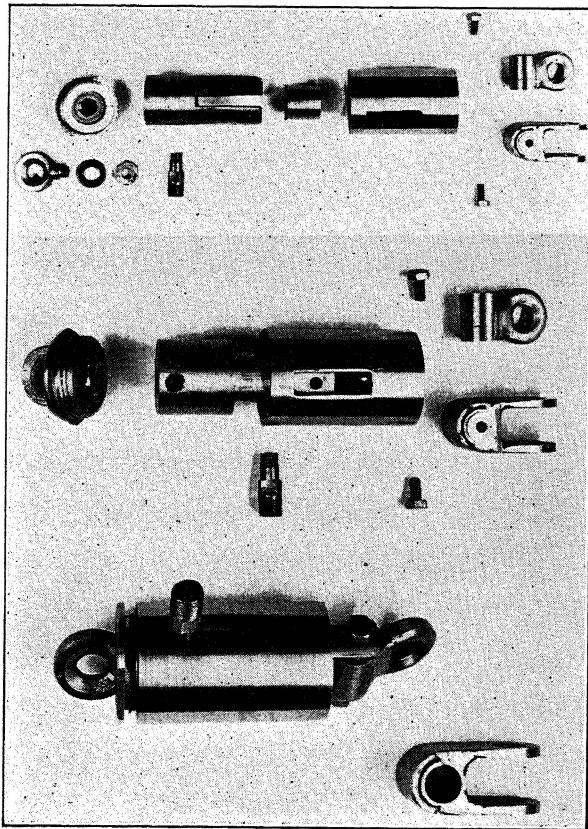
Views of the Small Hydraulic Unit at Different Stages of Assembly.
